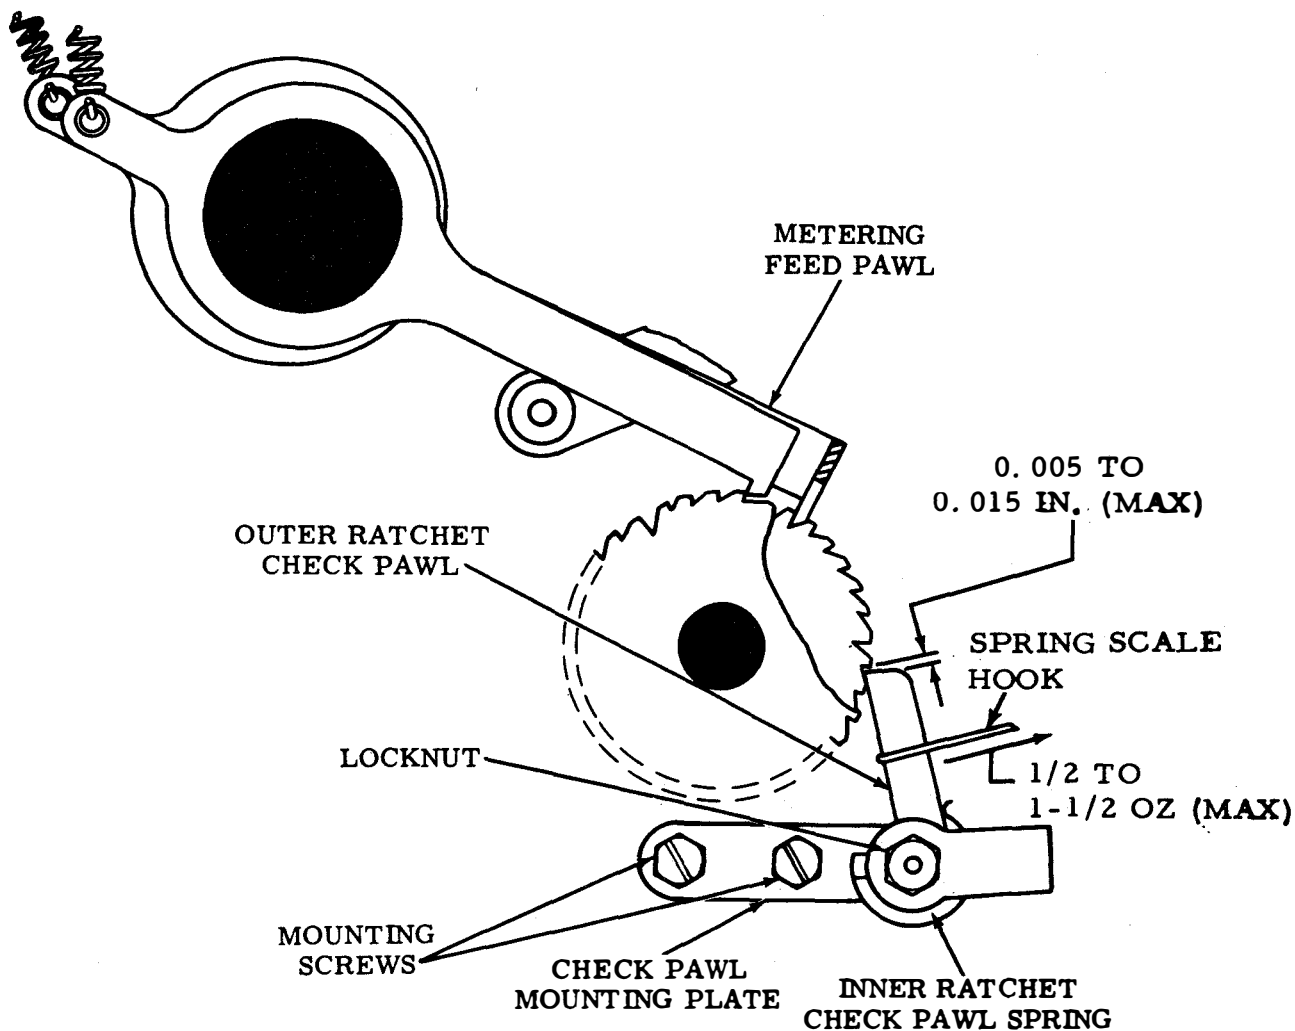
Inner Ratchet Check Pawl and Check Pawl Spring
